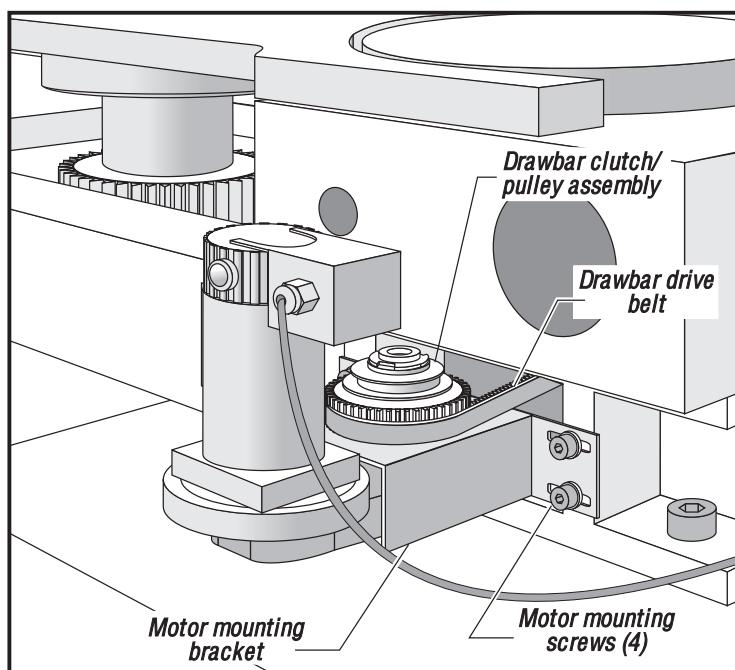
View of pallet changer rotary table (showing drawbar drive assembly)
